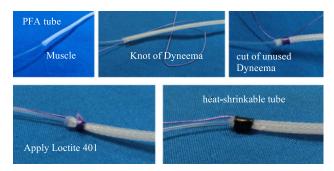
Fabrication of end part of 1.3 mm actuator (to air supply).
